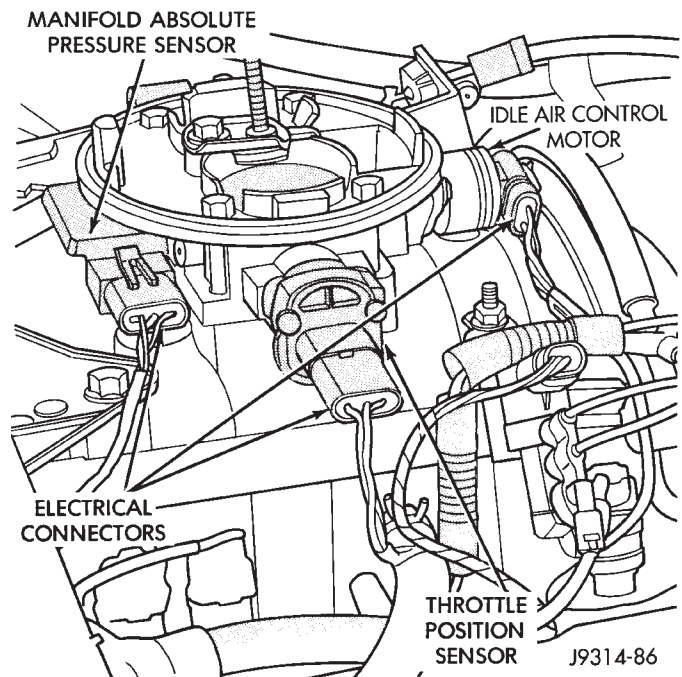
Sensor Testing—4.0L 6 Cylinder Engine
